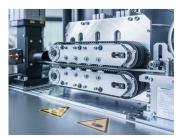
Installation with a calibratable length measuring device, belt feed and pneumatic cable cutter
